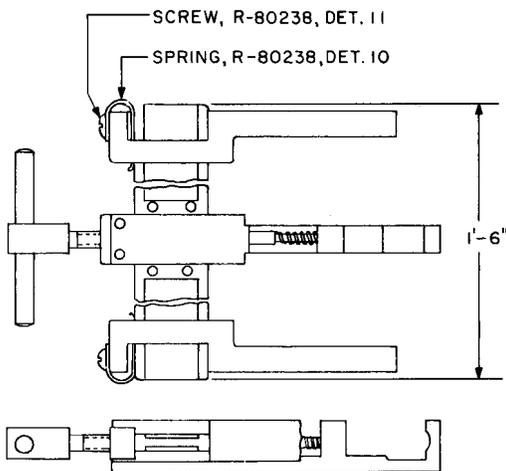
R-2039 Indicator Clamping Fixture Tool
